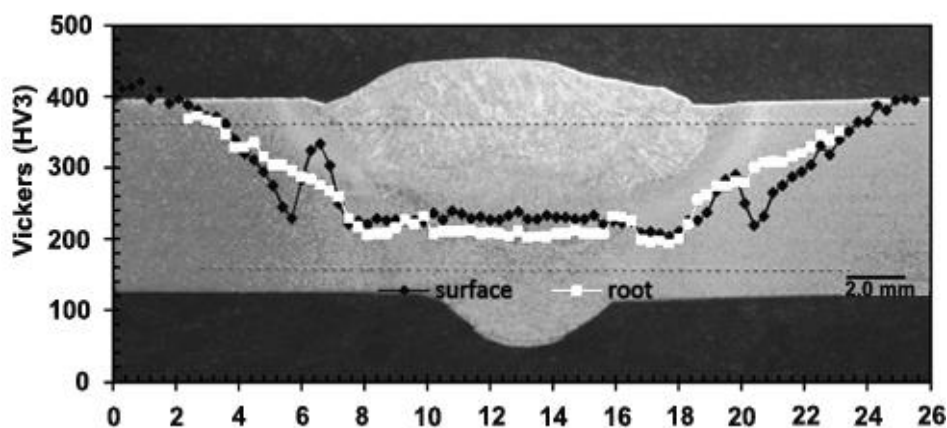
Hardness profile for 1225-2 weld joint (wire diameter 1.2 mm).
